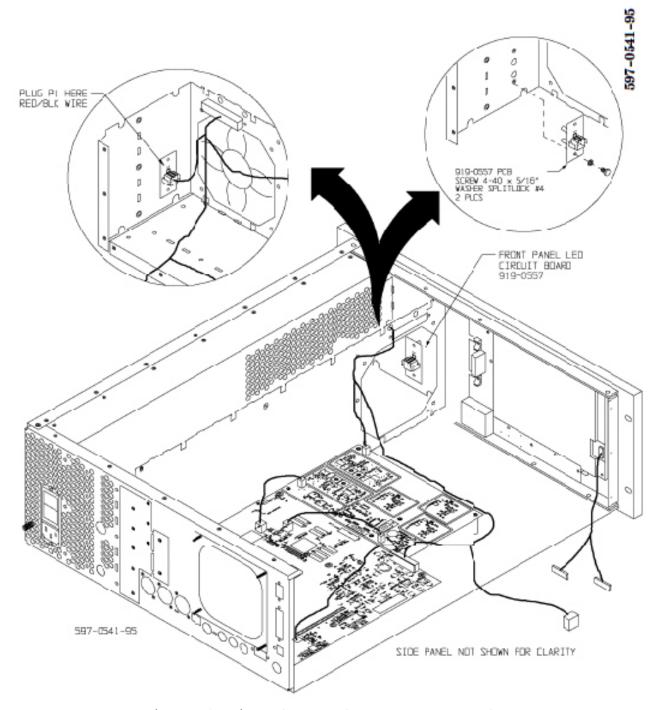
FXi LED BOARD REMOVAL AND REINSTALLATION
